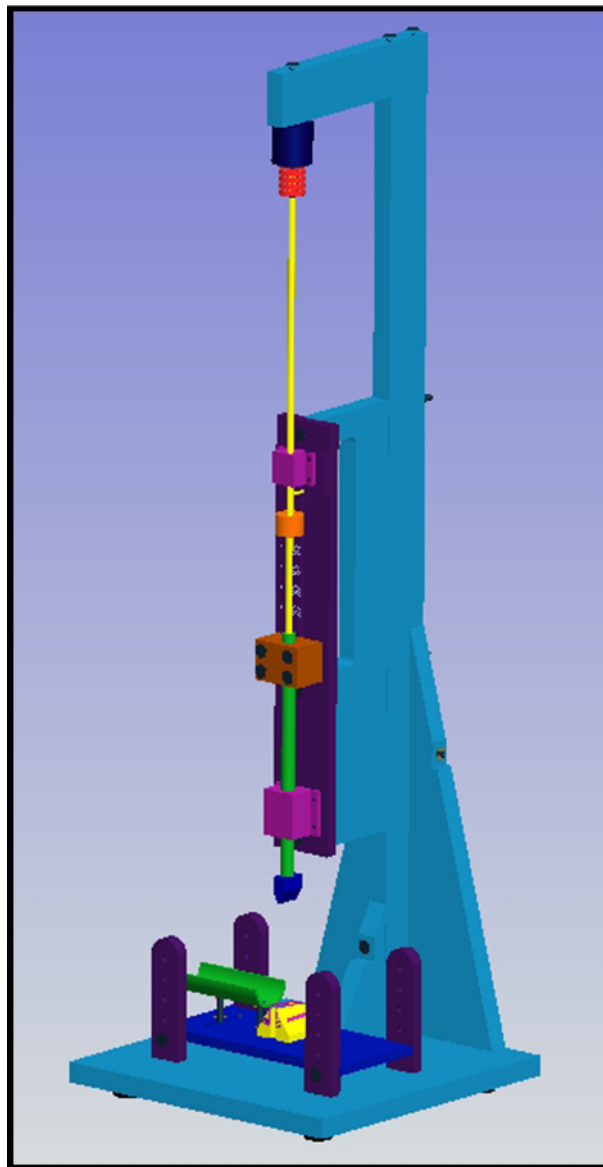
Assembly overview of prototype uniaxial gravity-driven fracture device
